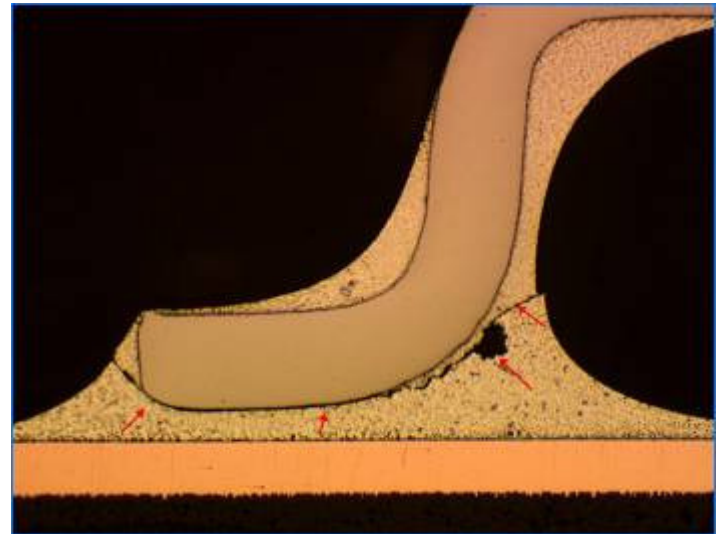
cross section, SN67, U62, left lead solder crack, 100x
